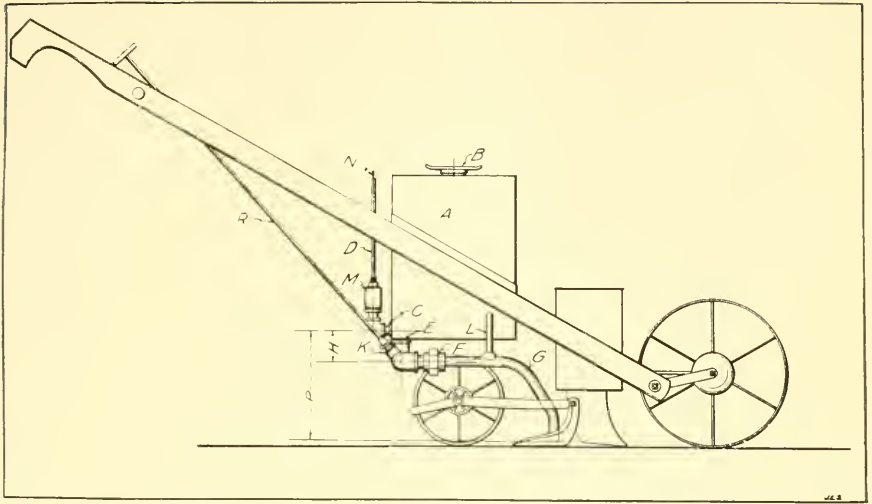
Mechanical drawing showing details of formaldehyde tank construction.
